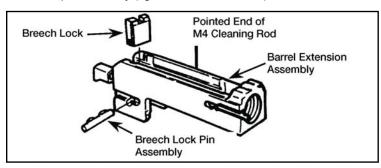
Removal of the breech lock pin assembly and breech lock
